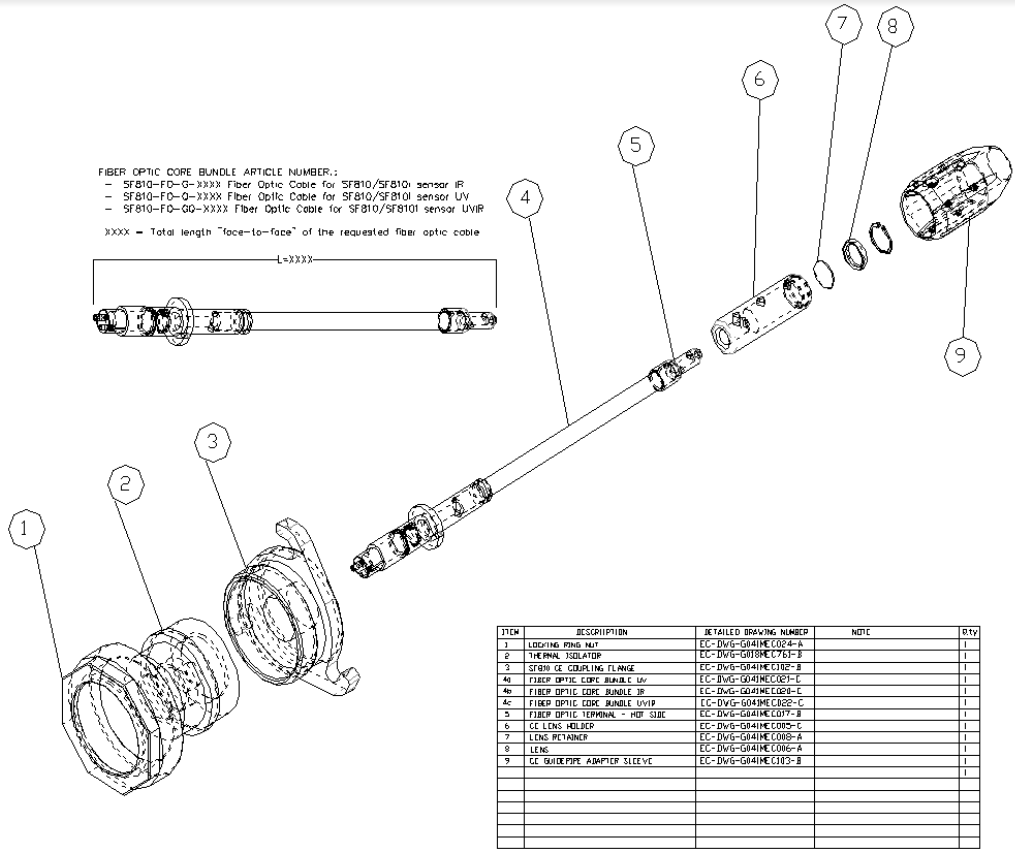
DFS/CE Standard Replacement - Internal Assembly
